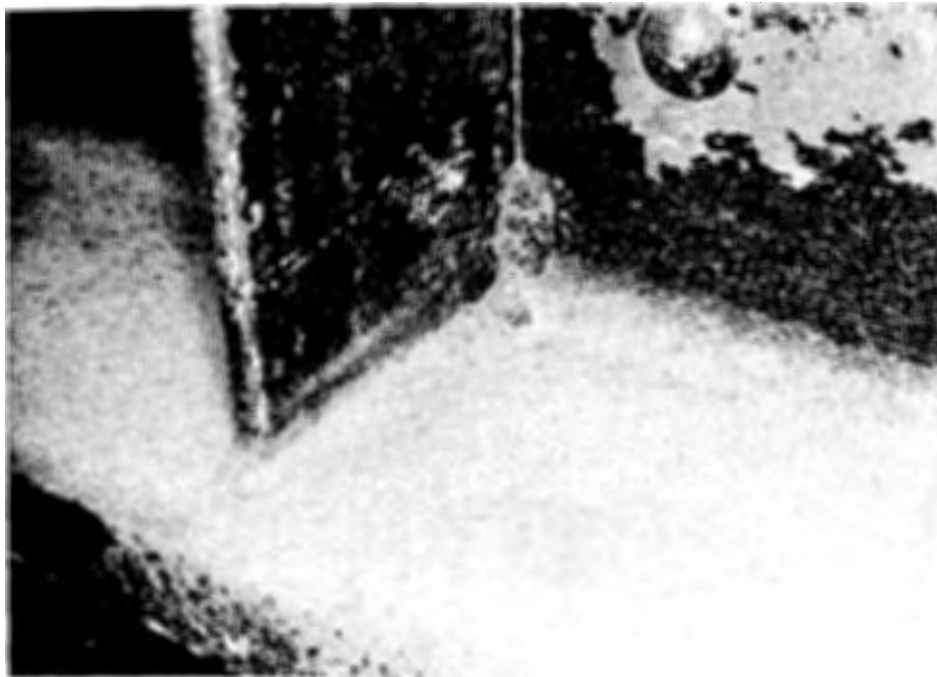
Corrosion at weld toe creates smoother weld transition.
